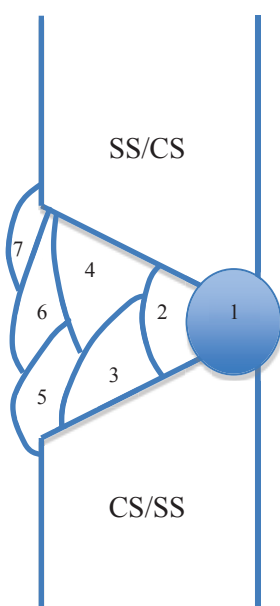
, Schematic sketch of how sample 3 and 5 (with gap) are welded.
